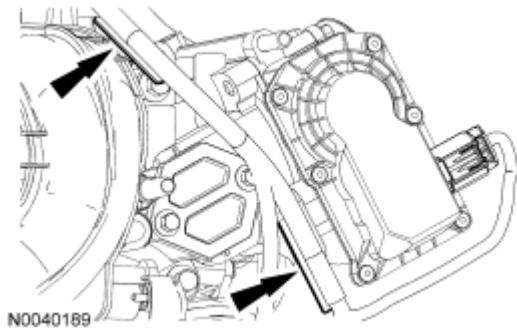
Locating Wiring Harness Pin-Type Retainers From Intake Manifold
